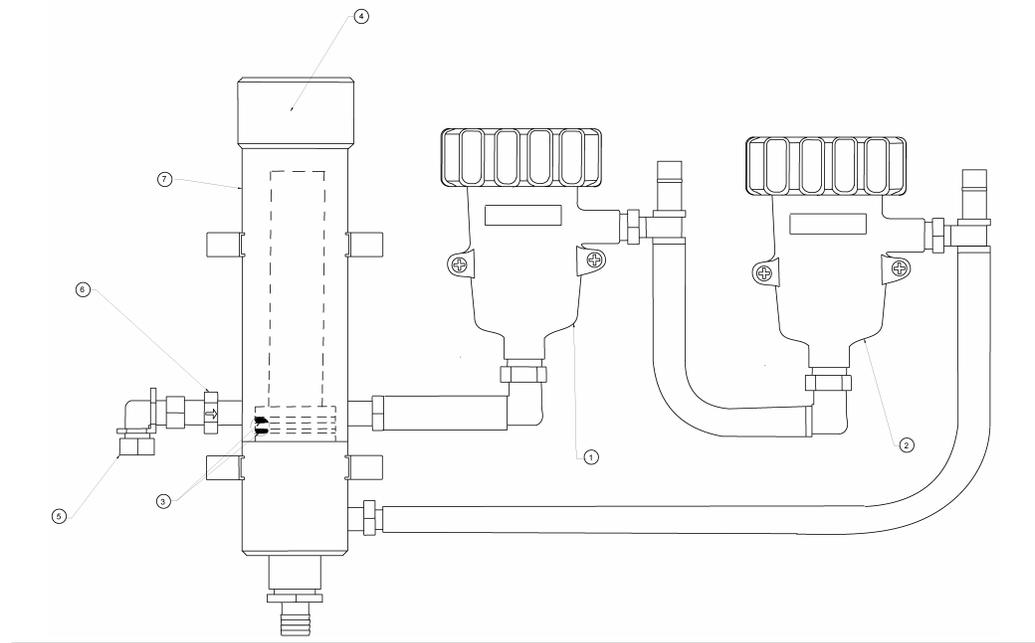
Rosemount FCL-01 Constant Head Flow Controller Assembly Replacement Parts
